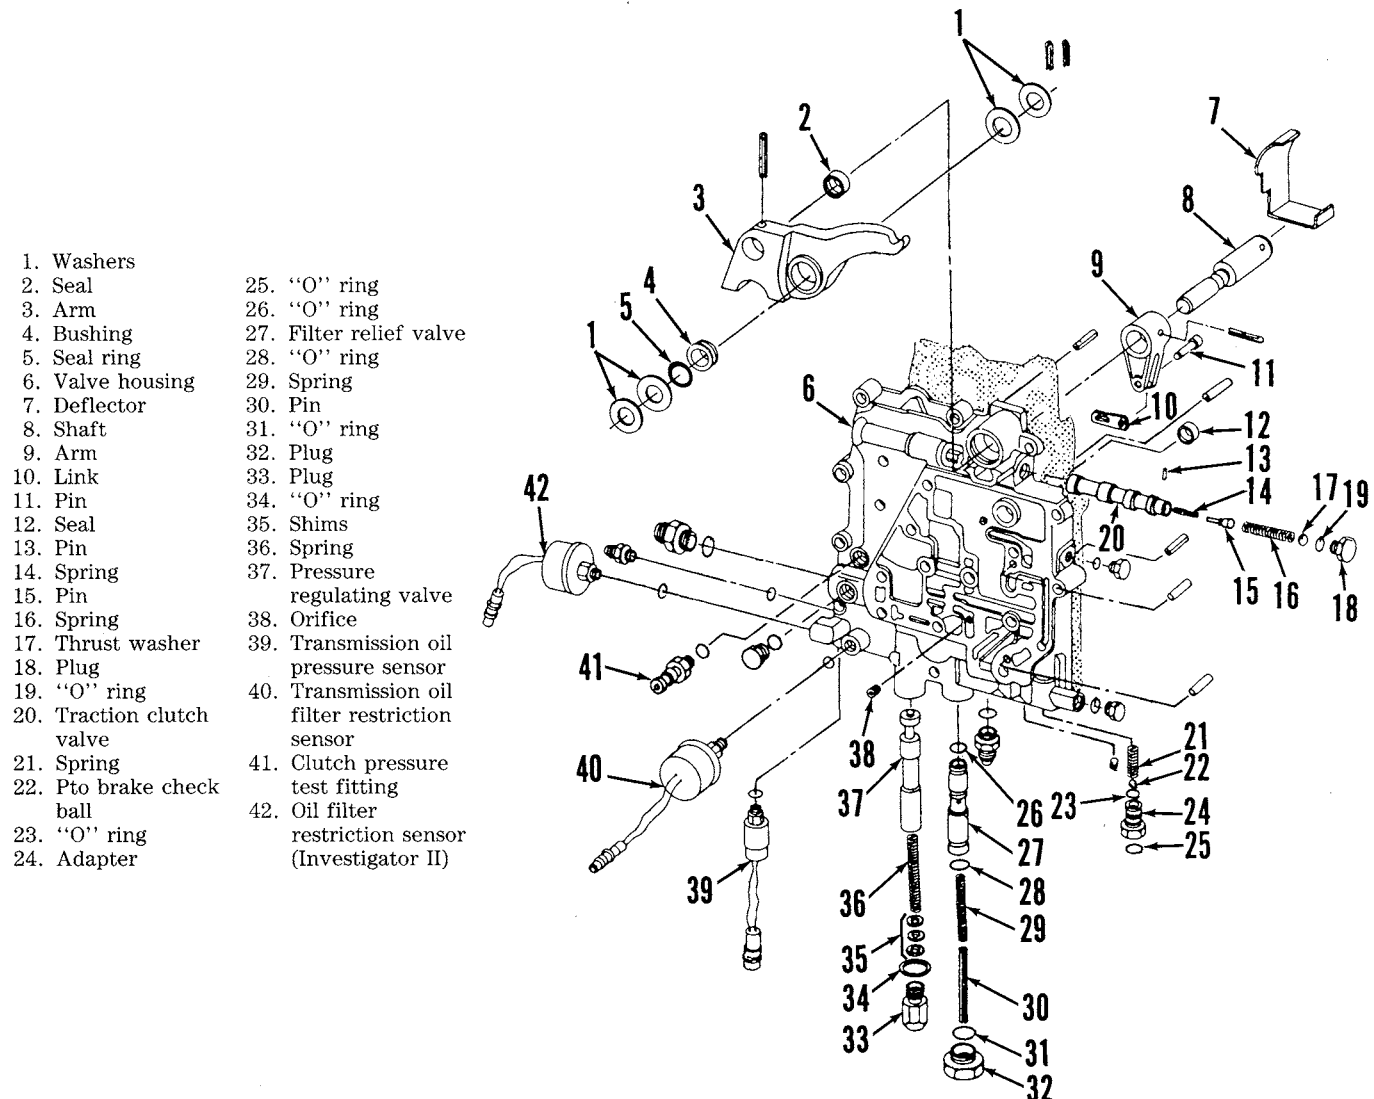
Exploded view of traction clutch valve housing used on Power Shift models.
